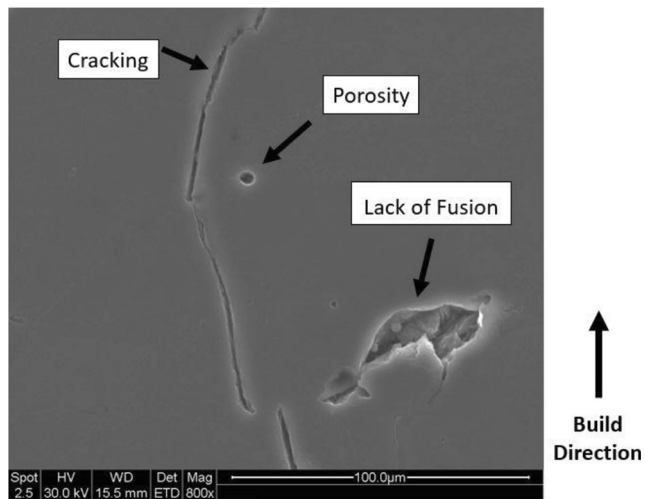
Examples of the different types of welding related defects found in AM parts [94]
